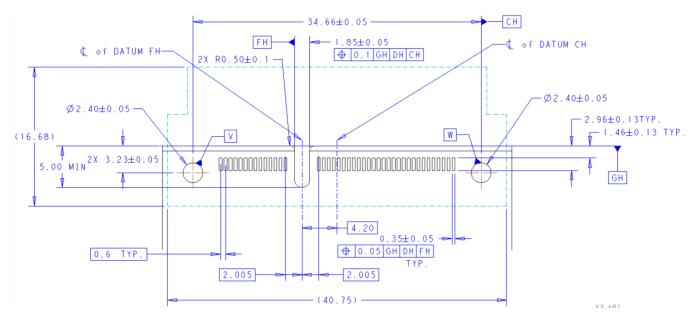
2C STRADDLE MOUNT CONNECTOR FOOTPRINT
